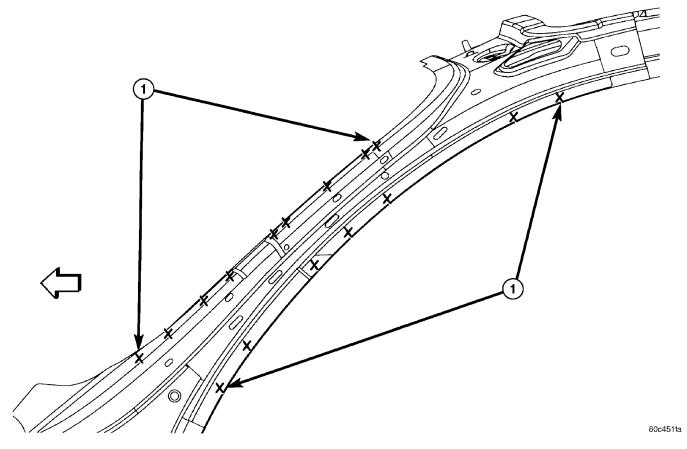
INNER WINDSHIELD SIDE FRAME TO BODY SIDE APERTURE PANEL
